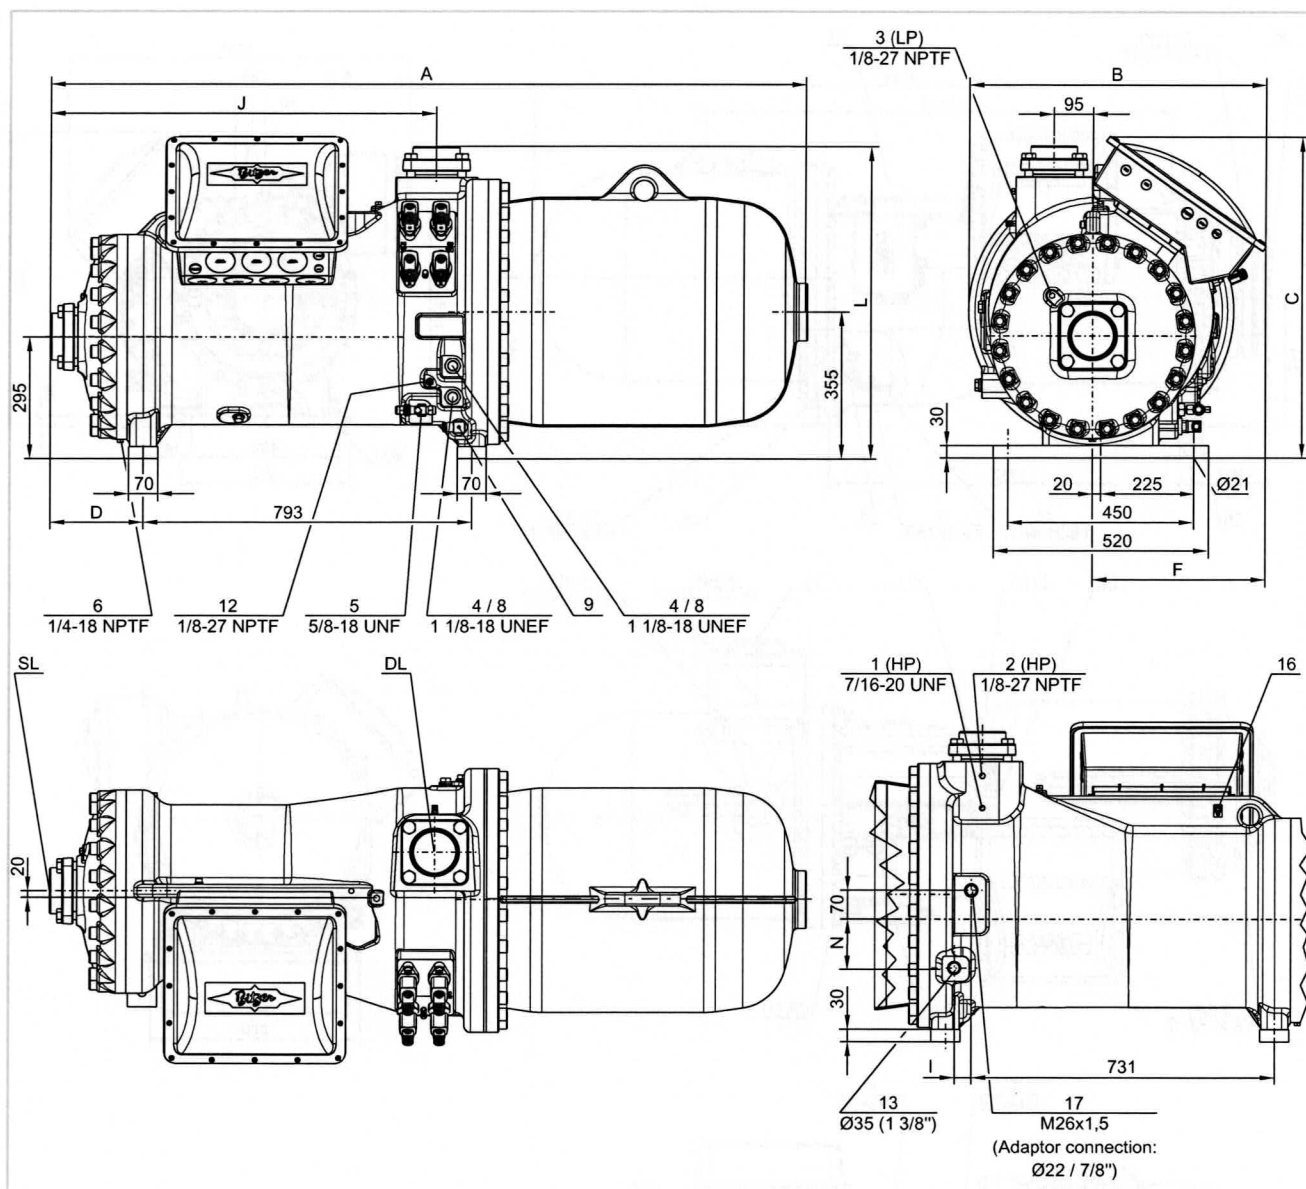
Dimensional drawing CSW9563-140Y .. CSW95113-320(Y), CSH9663-160Y .. CSH96113-320Y
